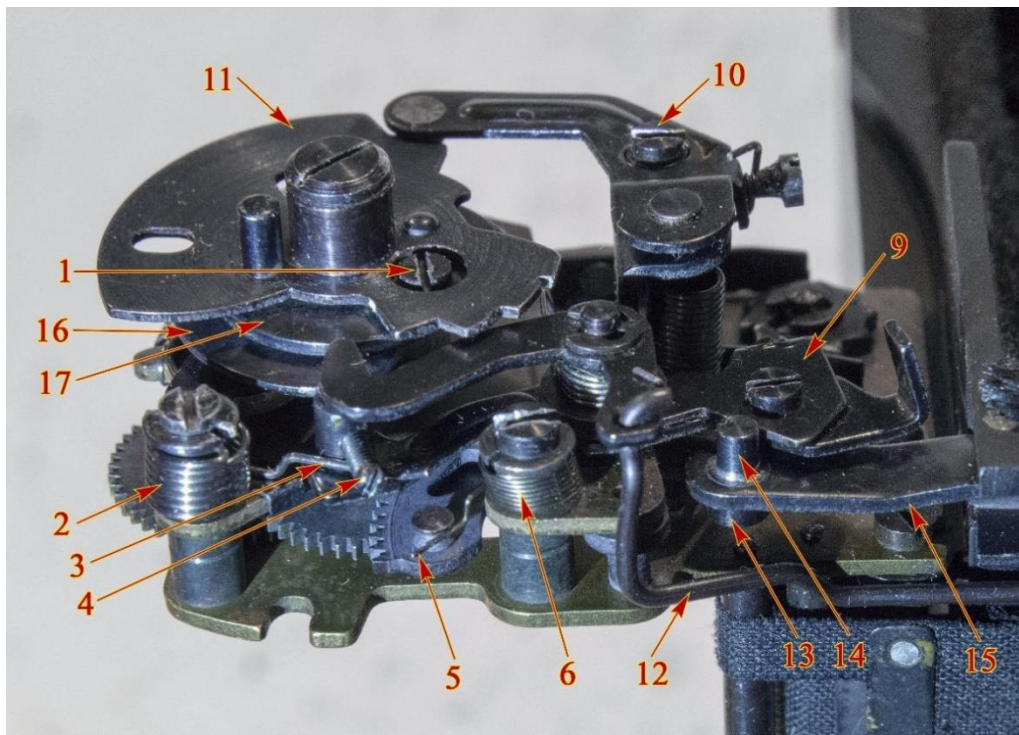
Pentacon six timing machine mounted on gear support (set to 1/60)
